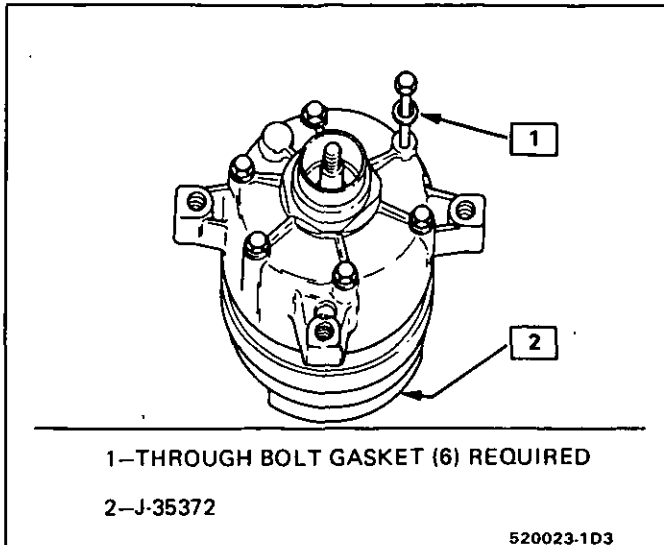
Front Head Installed: Thru Bolts and Gaskets In Place
